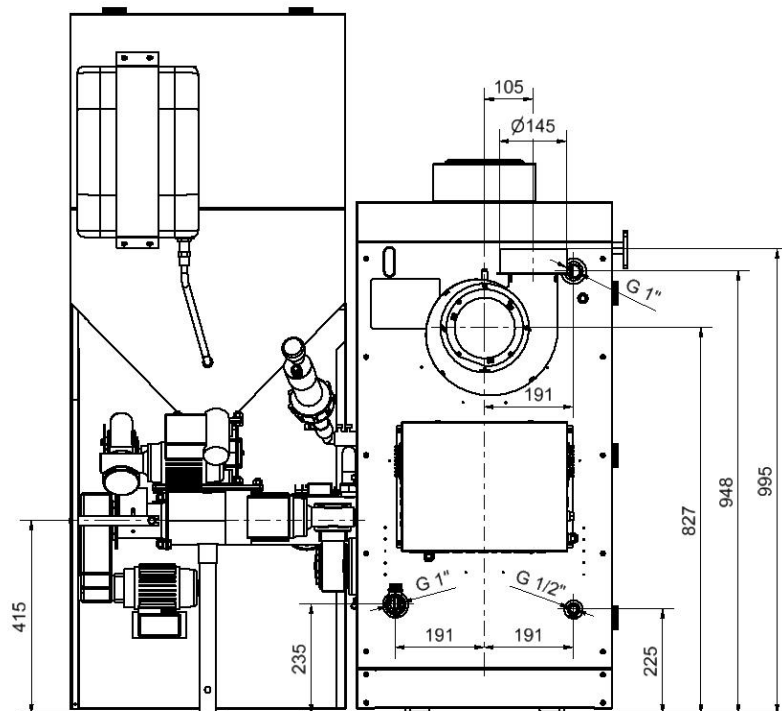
Connecting dimensions of BENEKOV R16 boiler
